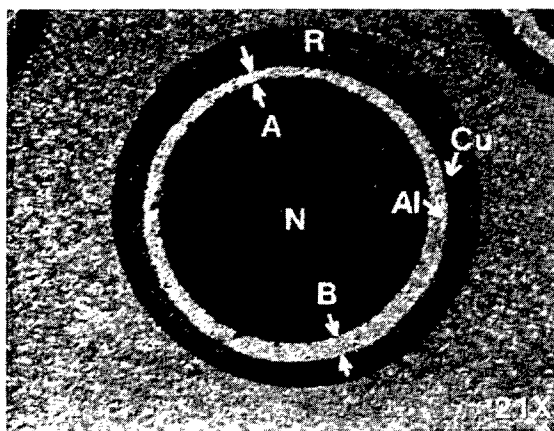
Metallographic cross-section of the aluminum clad steel wire; N = steel core, Al = aluminum, R = mounting resin, A, B = minimum and maximum thickness, respectively.
